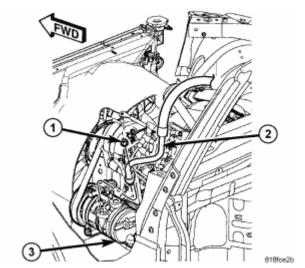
Removing/Installing A/C Suction Line Courtesy of CHRYSLER LLC
